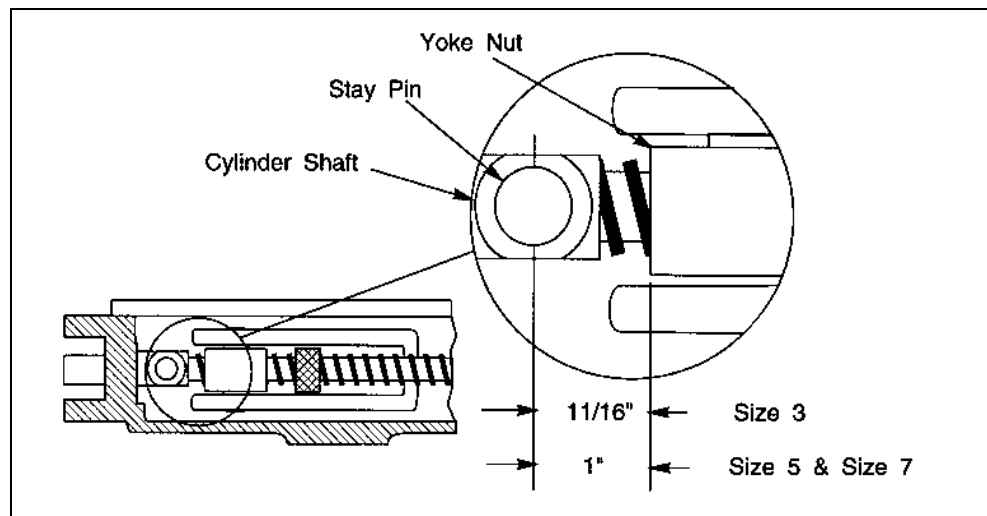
Distance from Stay Pin Hole to Yoke Nut
